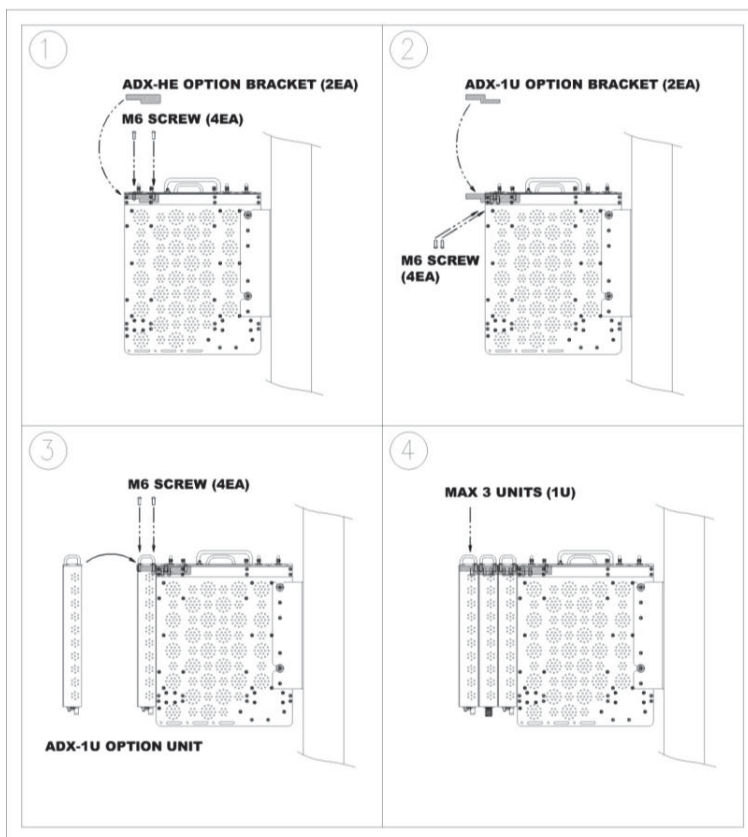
Wall Mount Instructions for ADX-HE added 1U Unit
